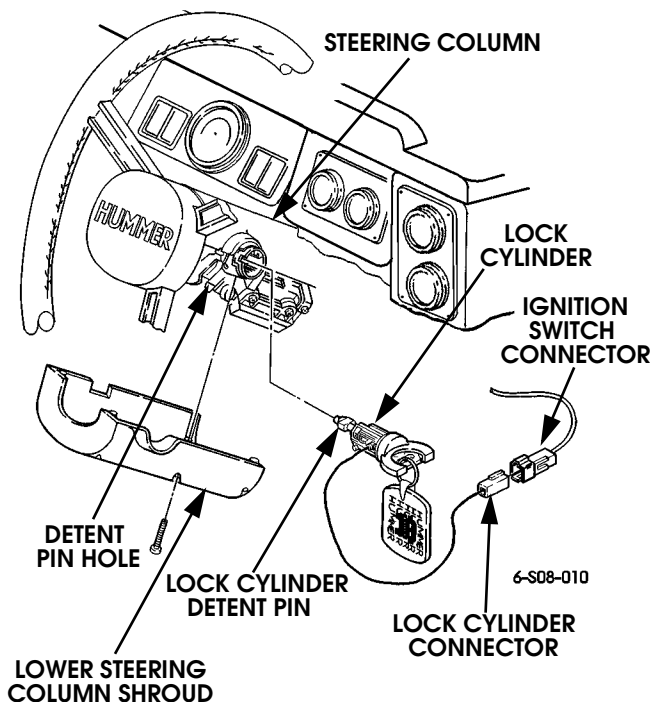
Ignition Switch Lock Cylinder Replacement
